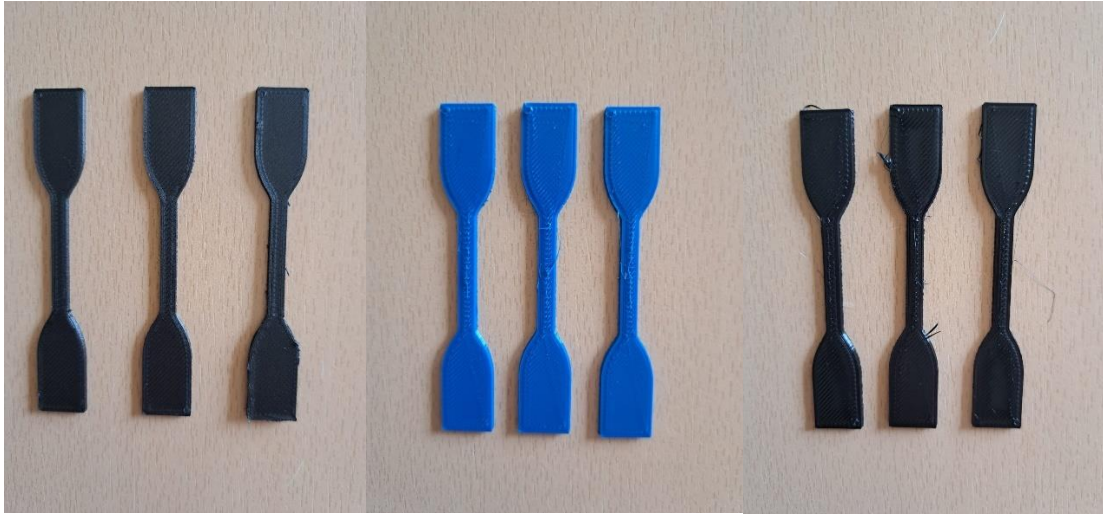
Printed Specimens using FDM 3D printer (left to right: Extrudr, Filanora and Spectrum)
